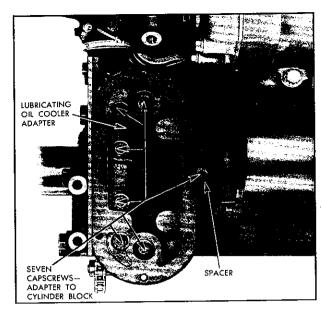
Mounting of Lubricating Oil Cooler Adapter.
